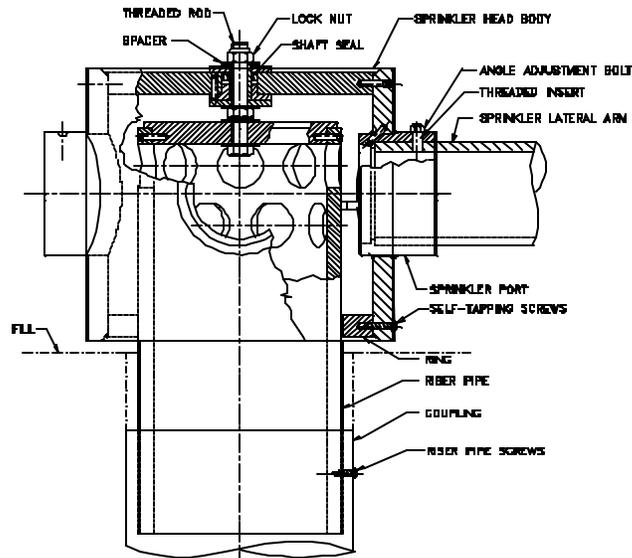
6" SPRINKLER HEAD ASSEMBLY
